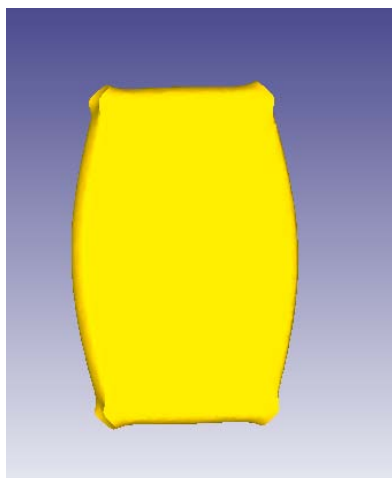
A forged rectangular billet exhibiting bulging
